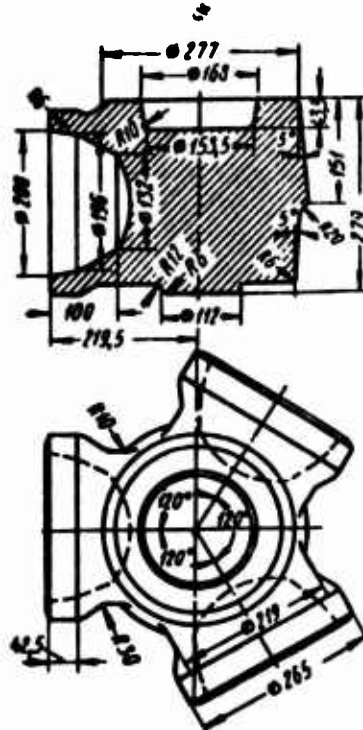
Forging of a bushing, stamped on a press (weight of forging 153 kg).
